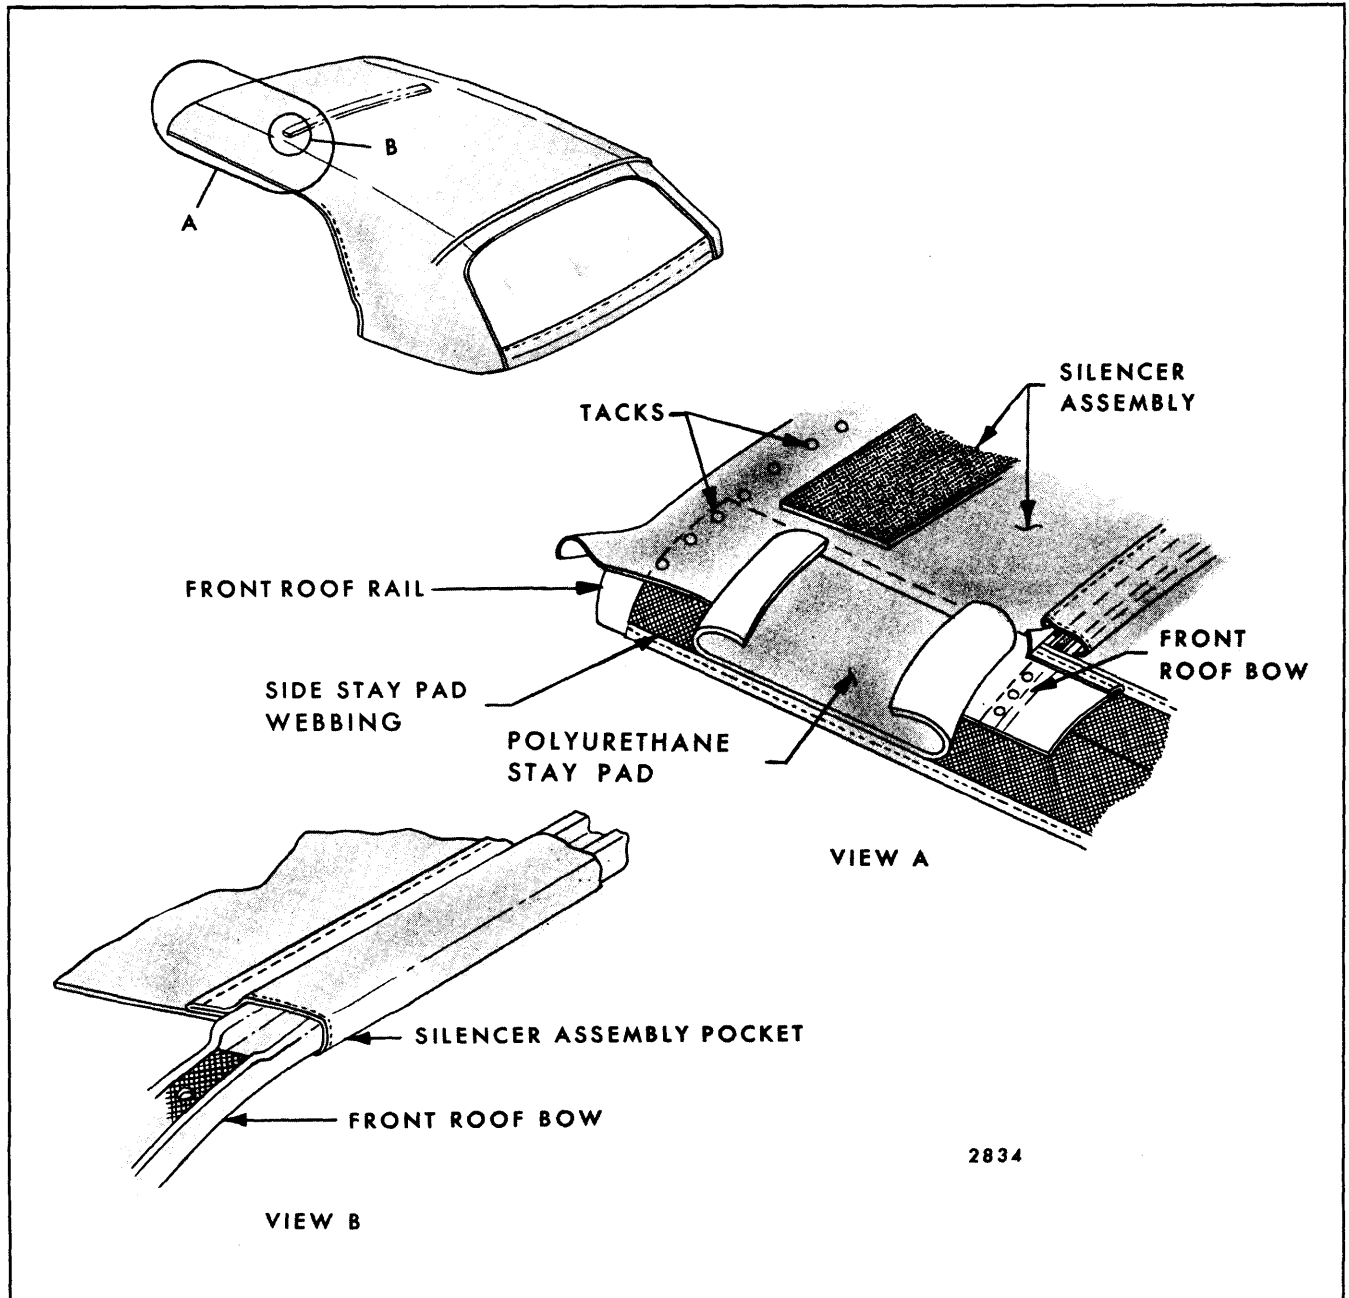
Folding Top Silencer Installation - Cadillac Styles
